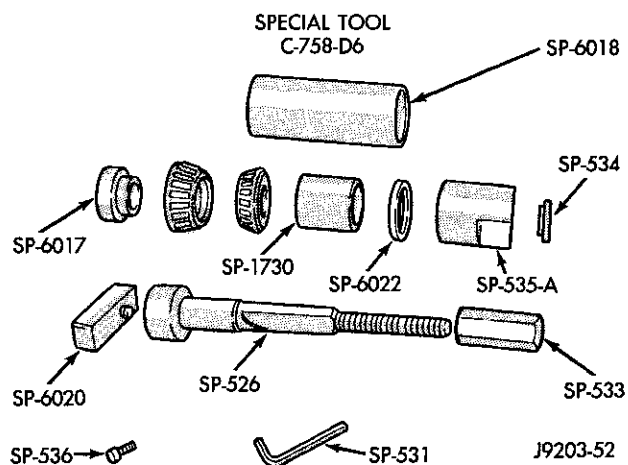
9 1/4 Axle Pinion Adjustment Tools
